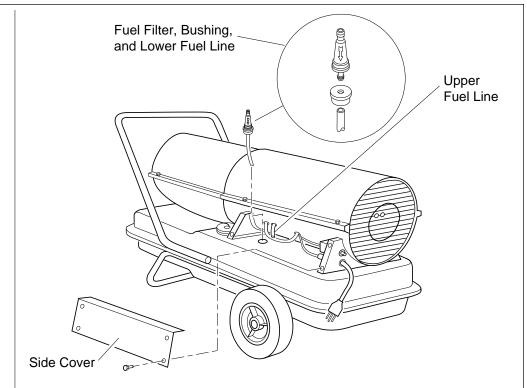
Fuel Filter Removal, 90,000 BTU/Hr Model
